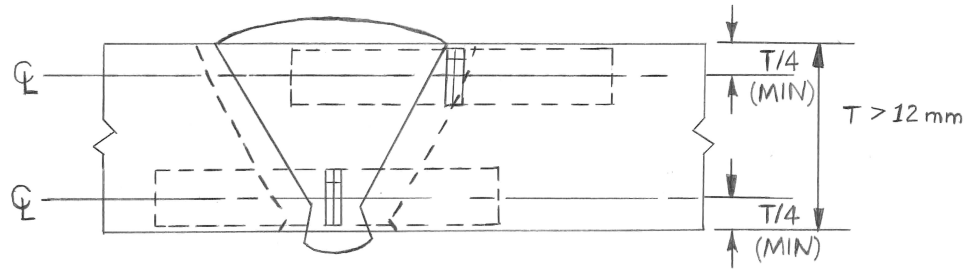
Sketch of Charpy weld specimens cutting locations [adapted from 83].
